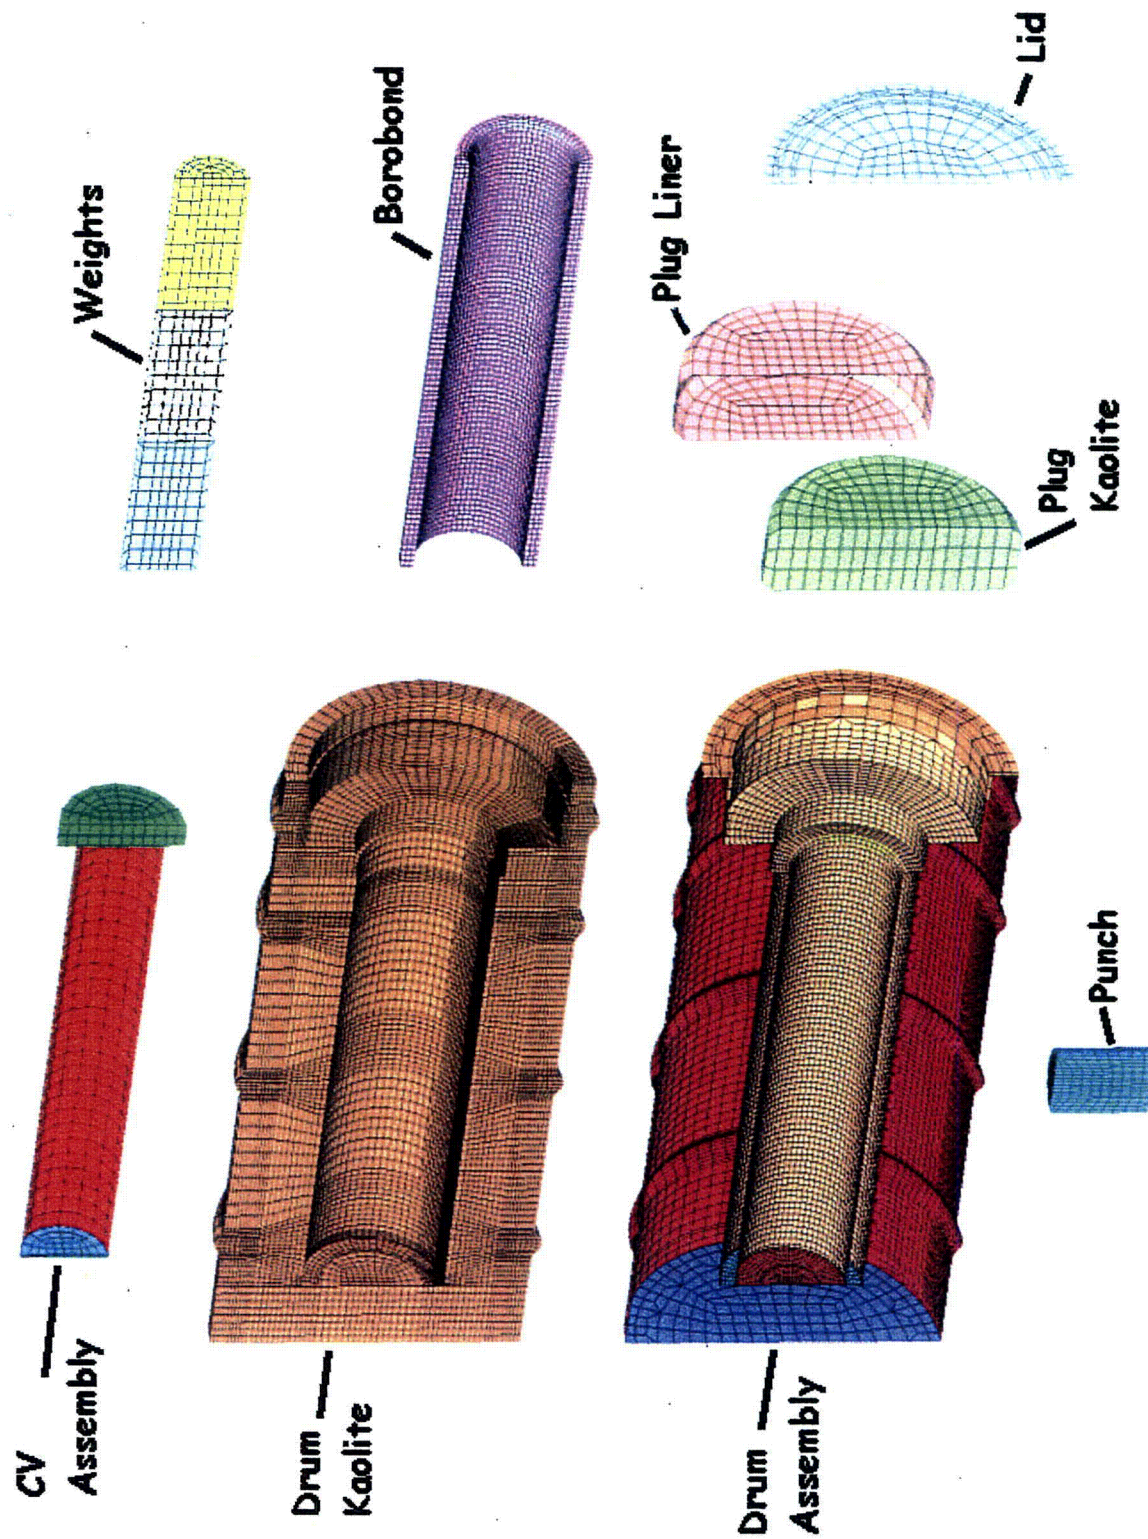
Exploded View of the ES-3100 Simple Model
